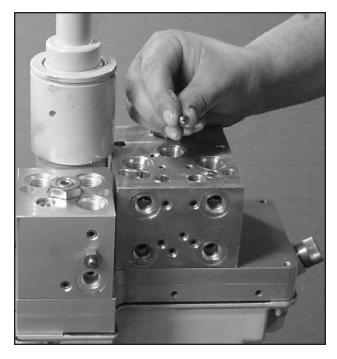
Drop the Relif Valve Ball onto the Ball Seat.
